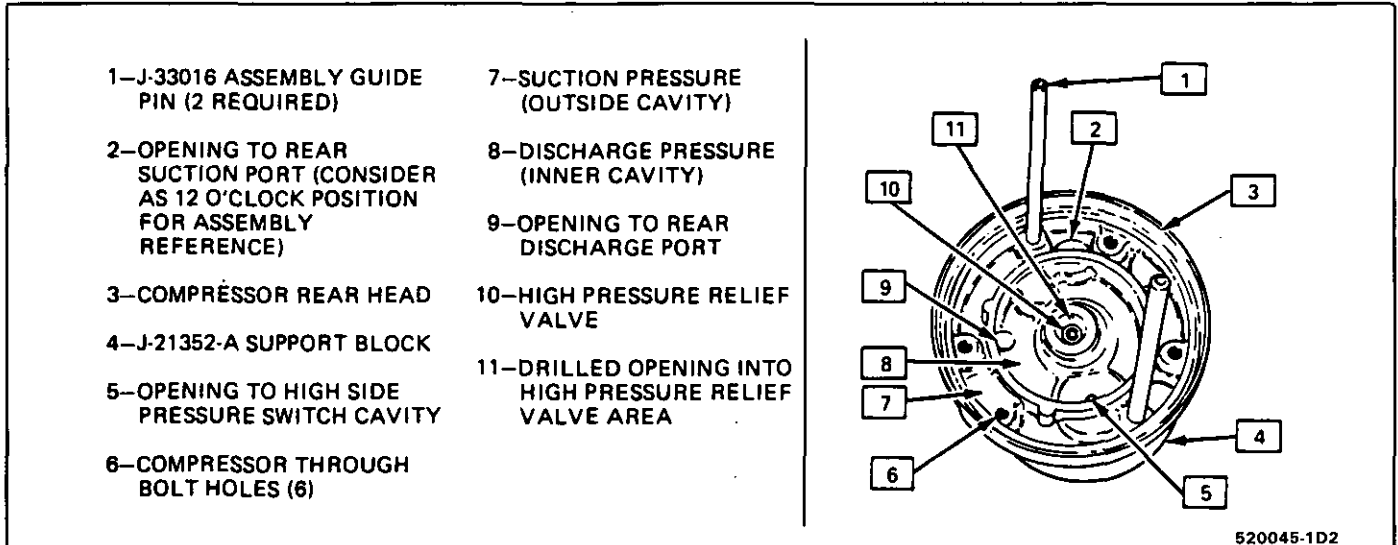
Detail of Compressor Rear Head-Assembly Guide Pins Installed
